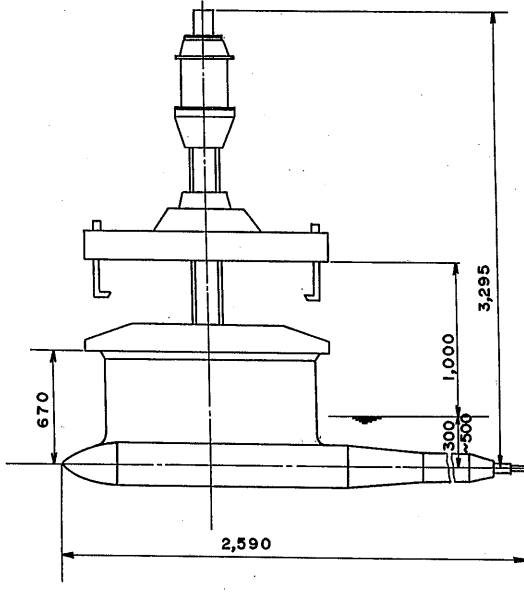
Shape and Dimensions of Large Capacity CRP Dynamometer for Propeller Open Test
